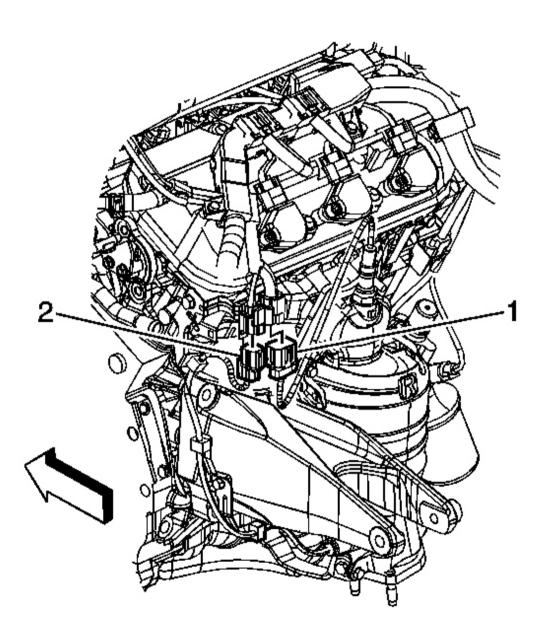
View Of Heated Oxygen Sensor (HO2S) Courtesy of GENERAL MOTORS CORP.
